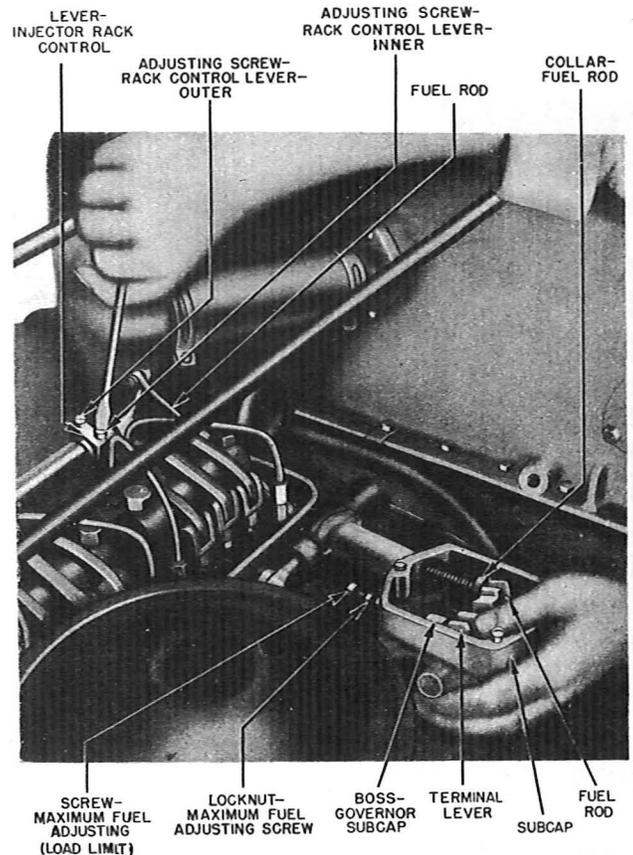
Adjusting Governor Terminal Lever With Wide Open Throttle
